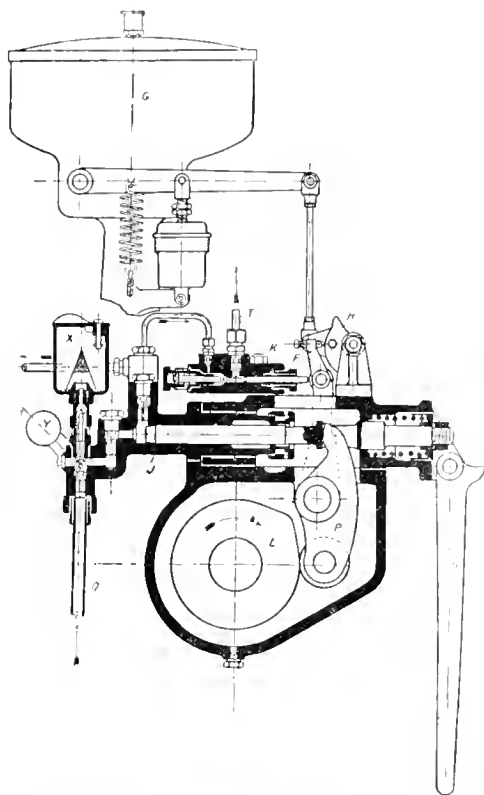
GOVERNOR GEAR OF THE CROSSLEY OIL ENGINE
